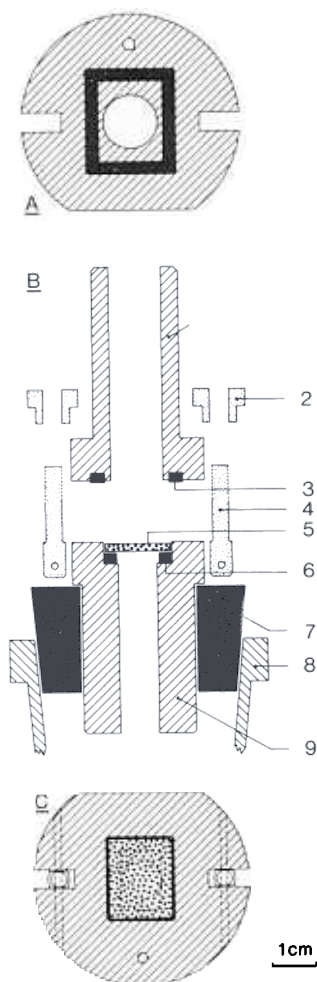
Cross-section of suction device. A. Bottom view of top section. B. Cross-section of unassembled device. C. Top view of bottom section. 1. Detachable top section. 2. Nut. 3. Neoprene or rubber washer (glued in groove). 4. Turn-away bolt for rapid assembly. 5. Porous plate. 6. Neoprene or rubber washer (need not be glued). 7. Perforated rubber stopper. 8. Rim of vacuum flask. 9. Bottom section. Note the small hole in the flange of the top section (A) and the fitting pin in the bottom section (C) for easy assembly.
